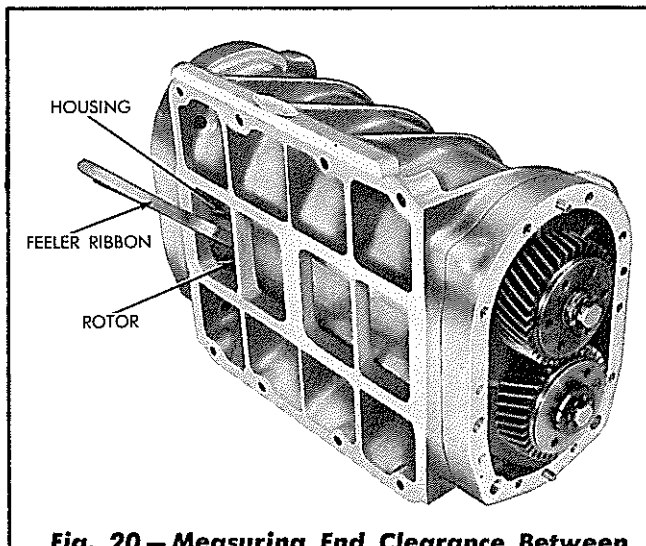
Measuring End Clearance Between Rotor and Housing
